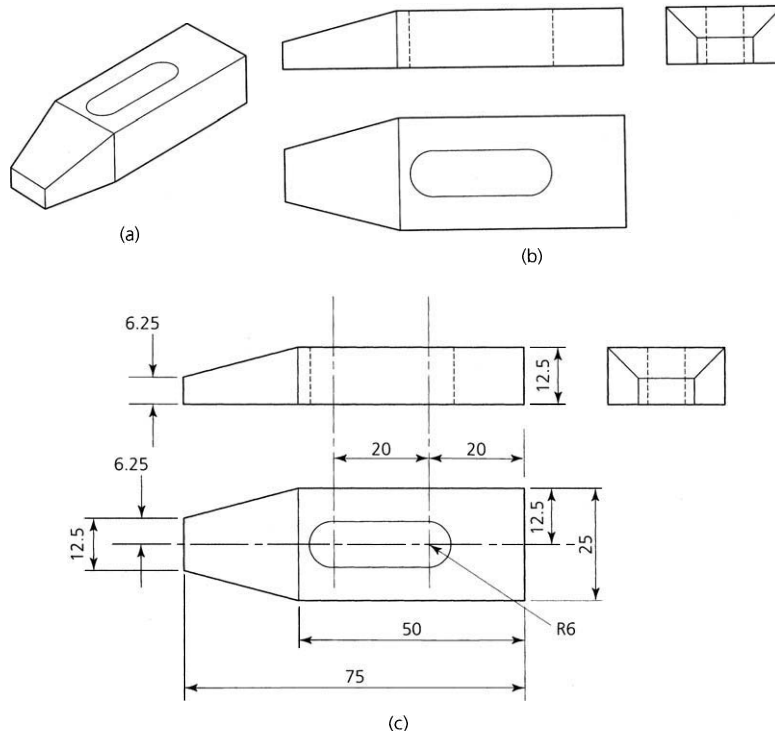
Clamp: (a) pictorial drawing; (b) orthographic drawing; (c) fully dimensioned in millimetres
